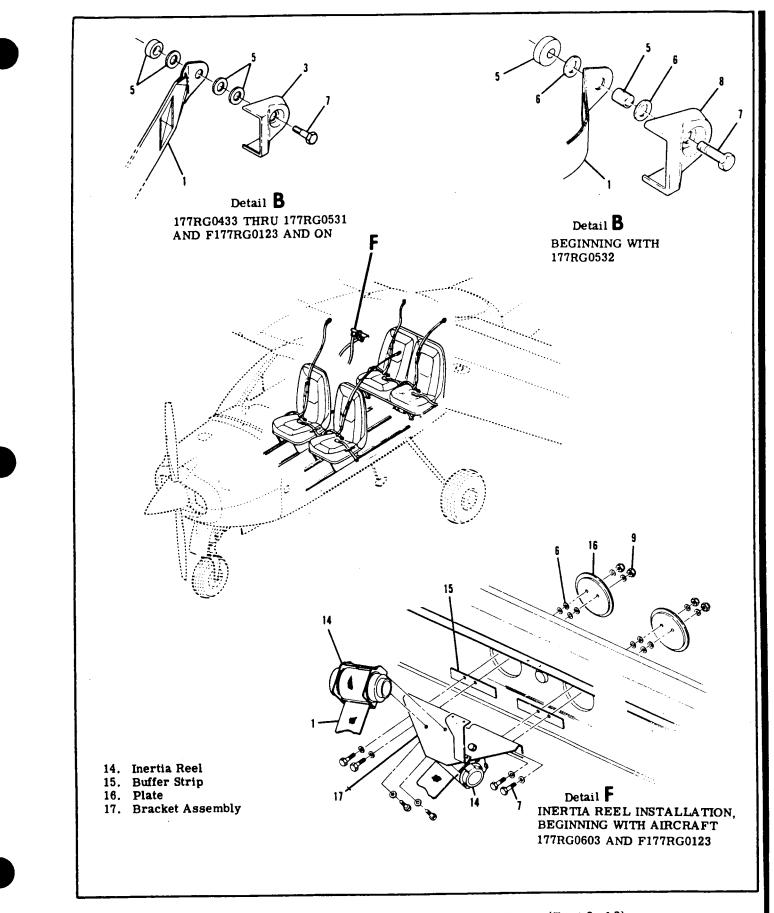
Seat Belt and Shoulder Harness Installation (Sheet 2 of 2)
